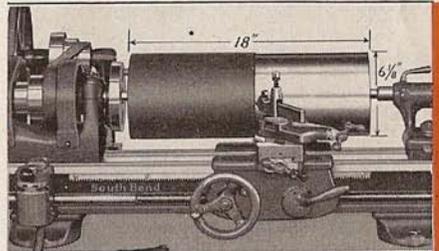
9" x 3 Lathe Takes Work 6 $\frac{1}{8}$ " in diameter over the tool carriage and 18" long.
